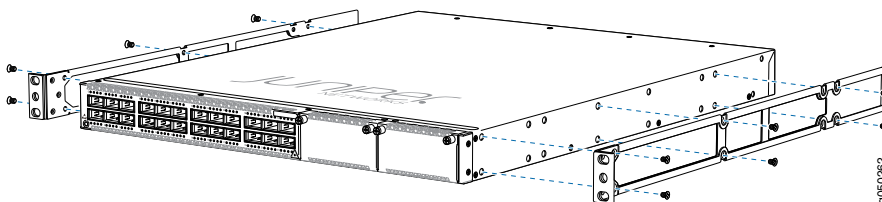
Attaching Mounting Rails to the QFX5100-48S
